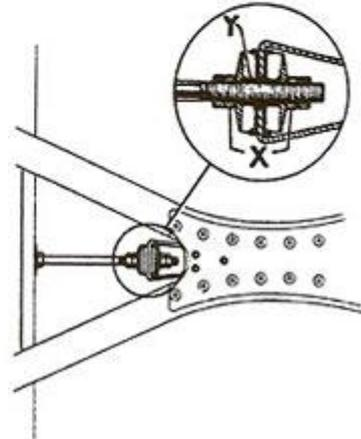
ADJUSTING THE TIE-ROD LENGTH.
